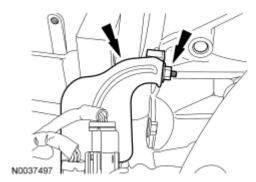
Locating Starter And Stud Bolts Courtesy of FORD MOTOR CO.
